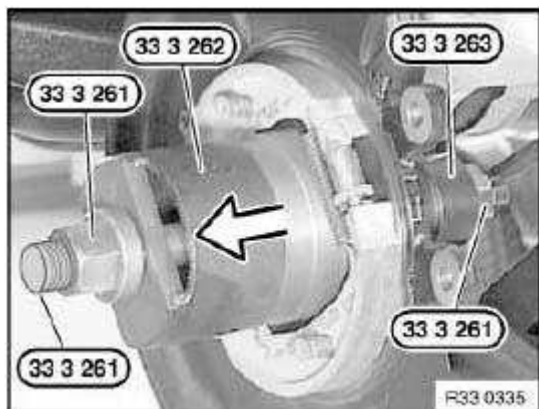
Pulling Special Tool (33 3 261), (33 3 262) And (33 3 263)
